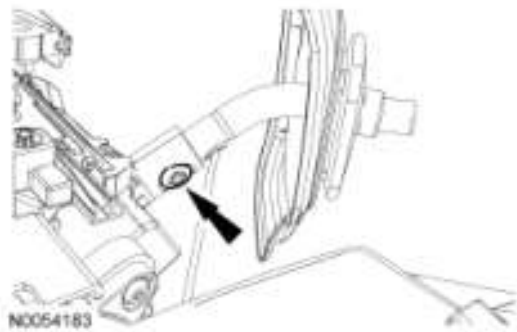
Identifying Flexplate Inspection Cover Bolts
